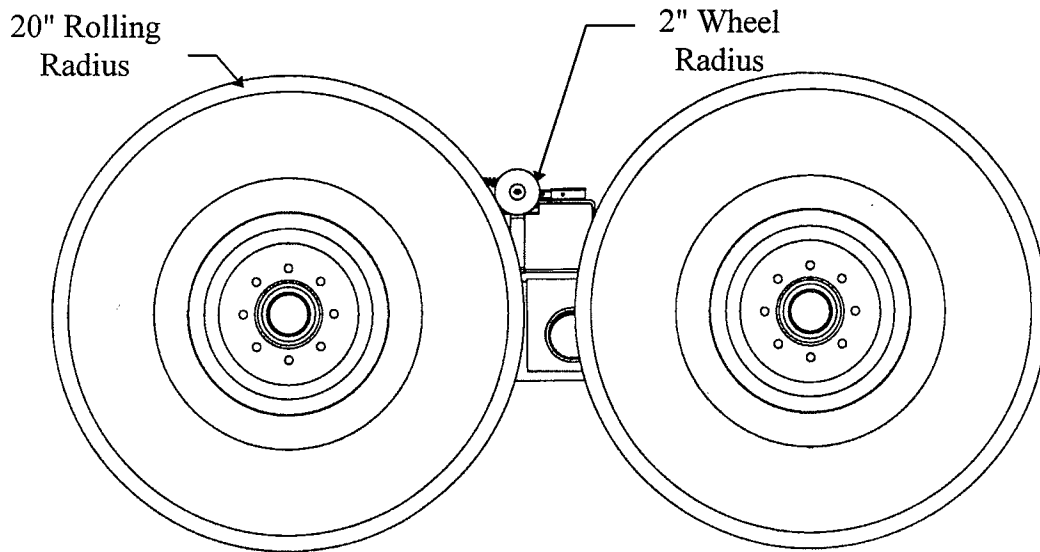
Side view of encoder assembly positioned on the tandem axle.
